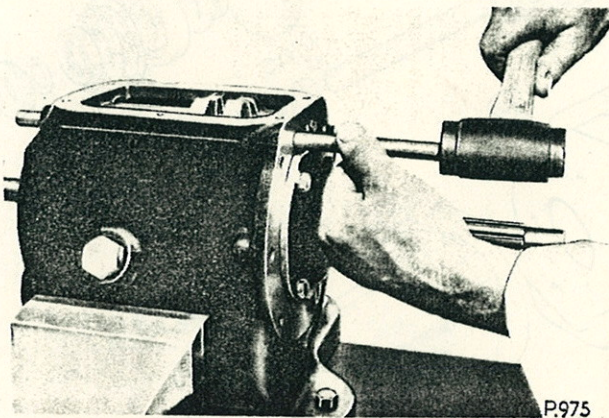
Tapping out the reverse selector shaft using the dummy shaft
